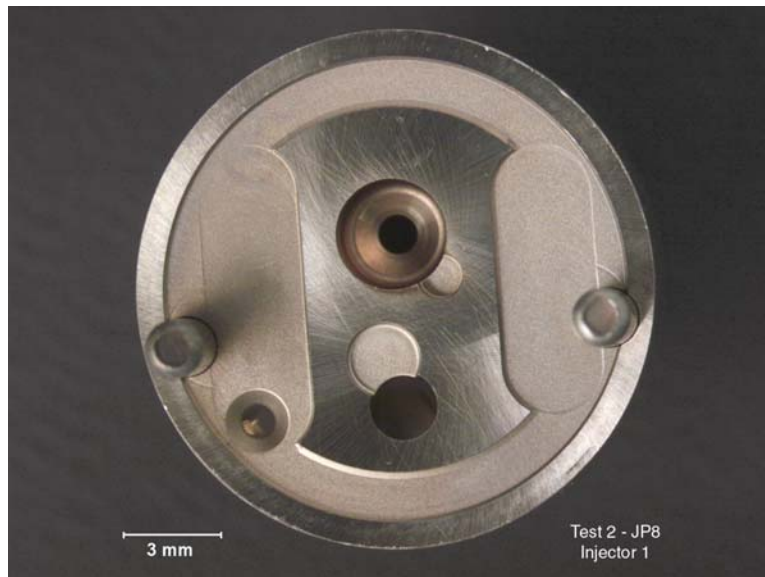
AF7801 JP8, Control Valve Plate (Bottom)
